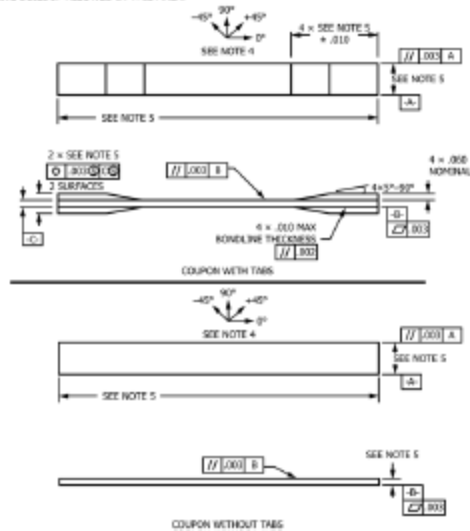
Tension Test Specimen Drawing (Inch-pound)
